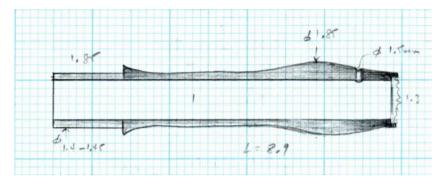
Agora A mouth piece section: drawing 1:1 reduced. Photo: Author.
